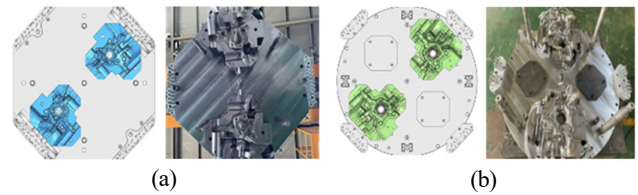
Design and external view of the CPC knuckle mold: (a) upper mold and (b) lower mold
